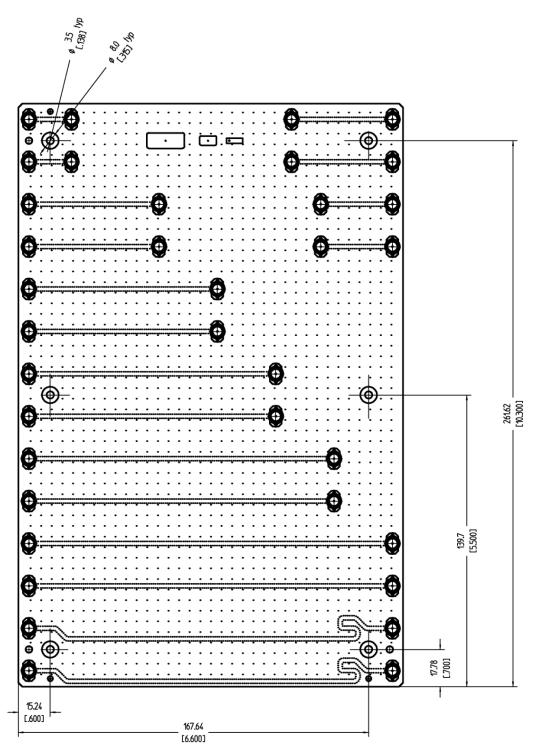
Mechanical drawing of M8049A-002 ISI channel boards with position of fastening holes.
